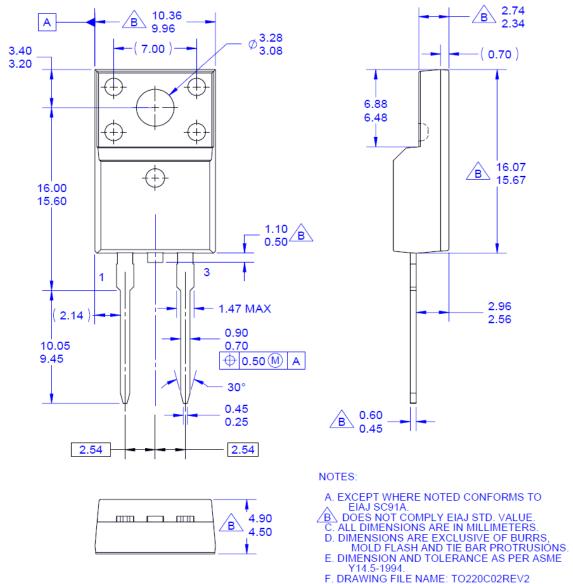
TO-220F 2L - 2LD; TO220; MOLDED; FULL PACK
